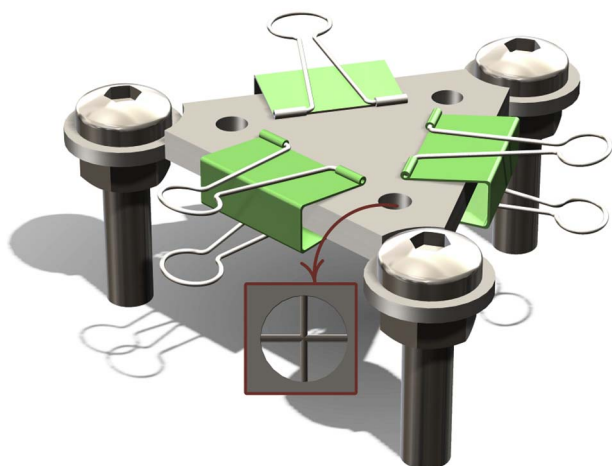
Three-dimensional (3D) schematic of laser micro-welding fixture.
